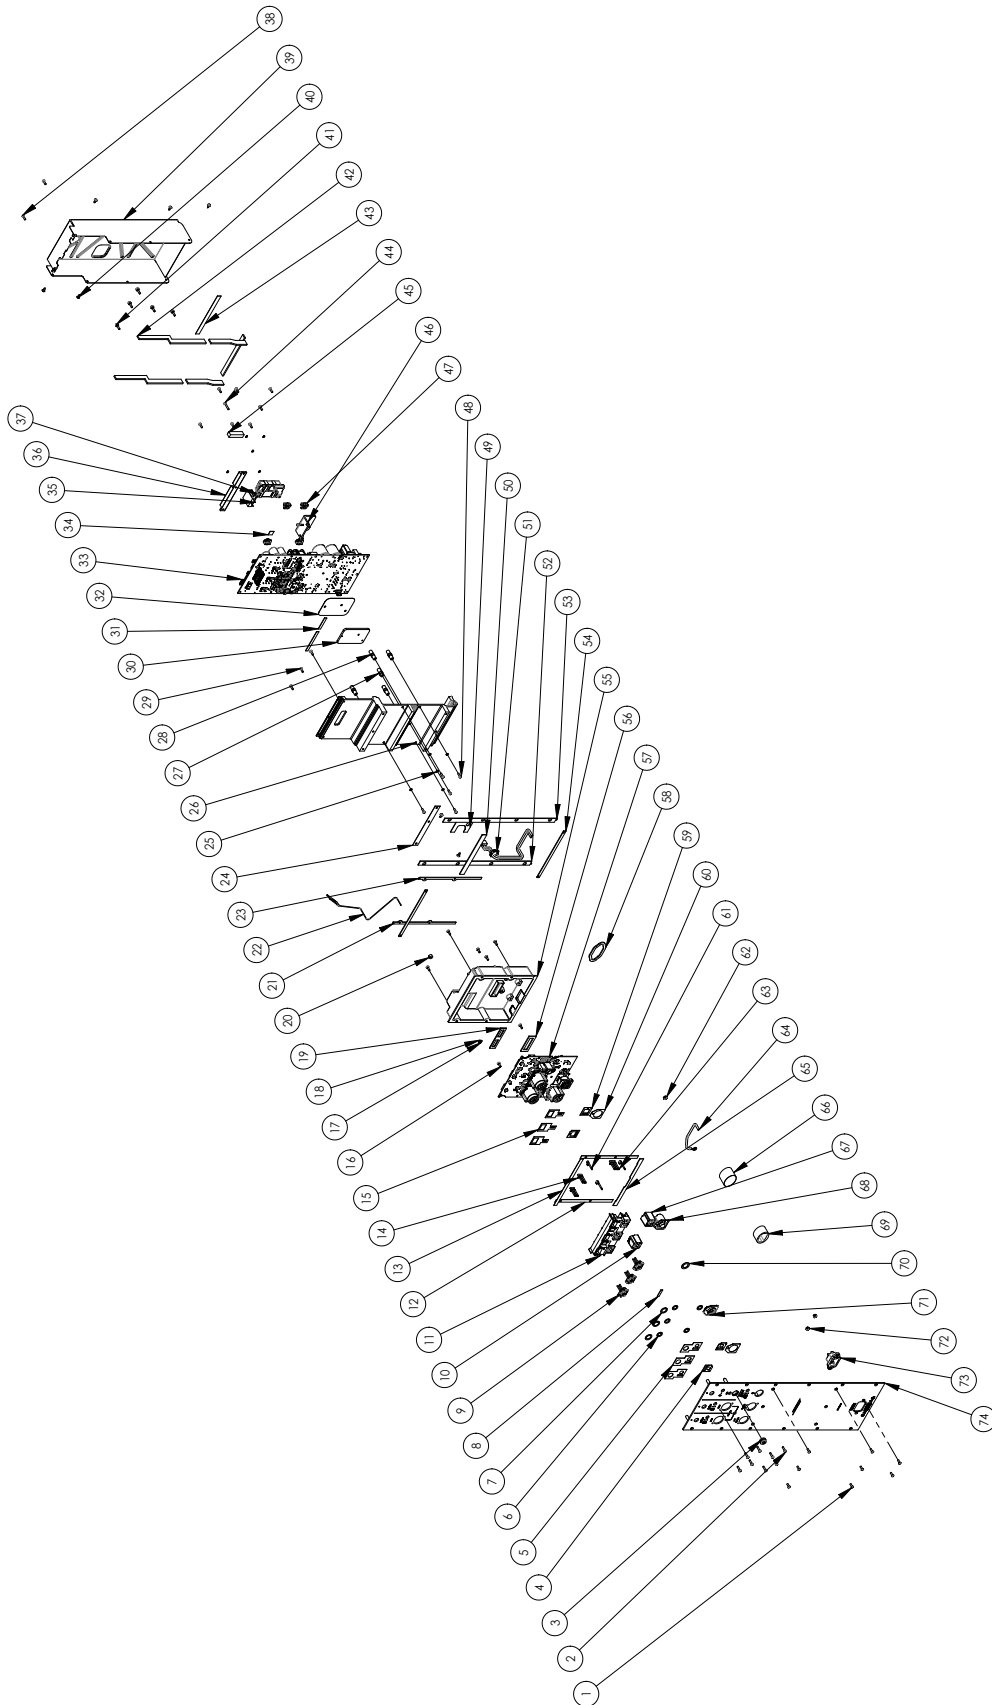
L1 Pro16 I/O Panel Assy Exploded View
